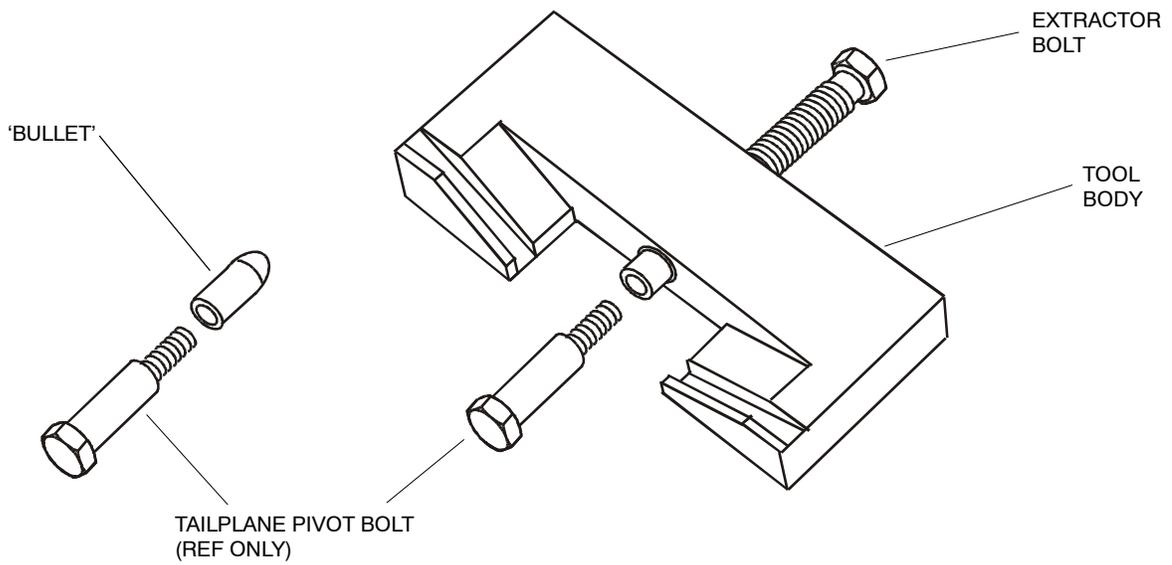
Tailplane Pivot Bolt Extractor Tool Kit
